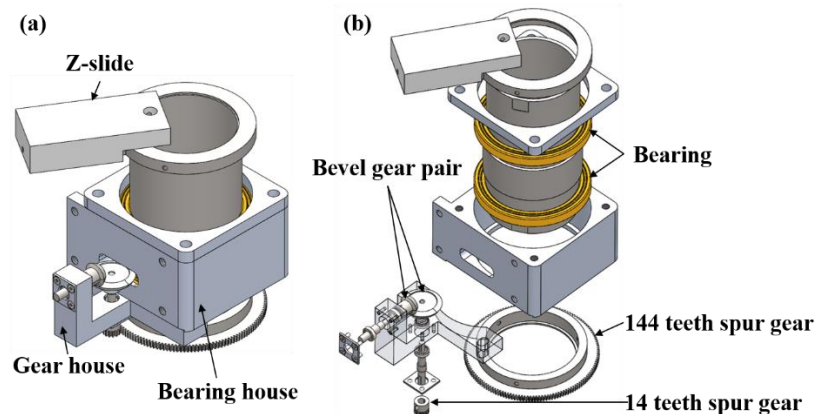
(a) 3D model of the sample rotation platform. The platform has a rectangular bearing housing as the main body. Inside, it holds a rotating tube with two bearings. On the top of the tube, a Z-slide, where the sample mount sits, is fixed on a collar. This Z-slide provides a translational motion for aligning the sample to the sample rotation axis. (b) Exploded view of the sample rotation platform. On the gear housing, there is a pair of bevel gears with a gear ratio of 0.5. Together with the pair of spur gears with the gear ratio of 14/144, the entire gear set provides a reduction ratio of 21.
